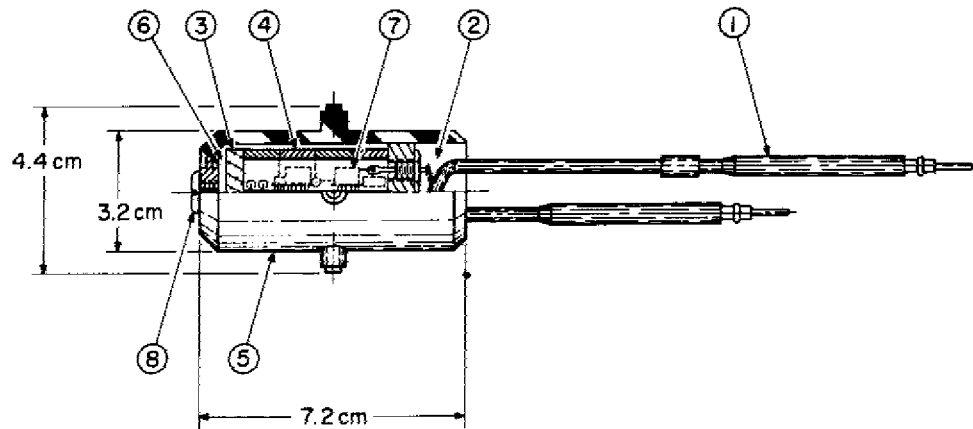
Sectional view of a USRD type H78D hydrophone: (1) connector, (2) potted cable assembly, (3) aluminum oxide end cap, (4) ceramic sensor, (5) butyl rubber boot with integral mounts, (6) castor oil, (7) preamplifier, and (8) oil-fill screw
